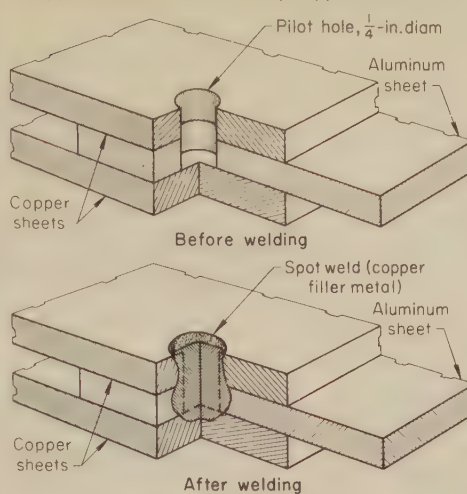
Gas metal-arc spot weld with copper filler metal joining copper-aluminum-copper sandwich
